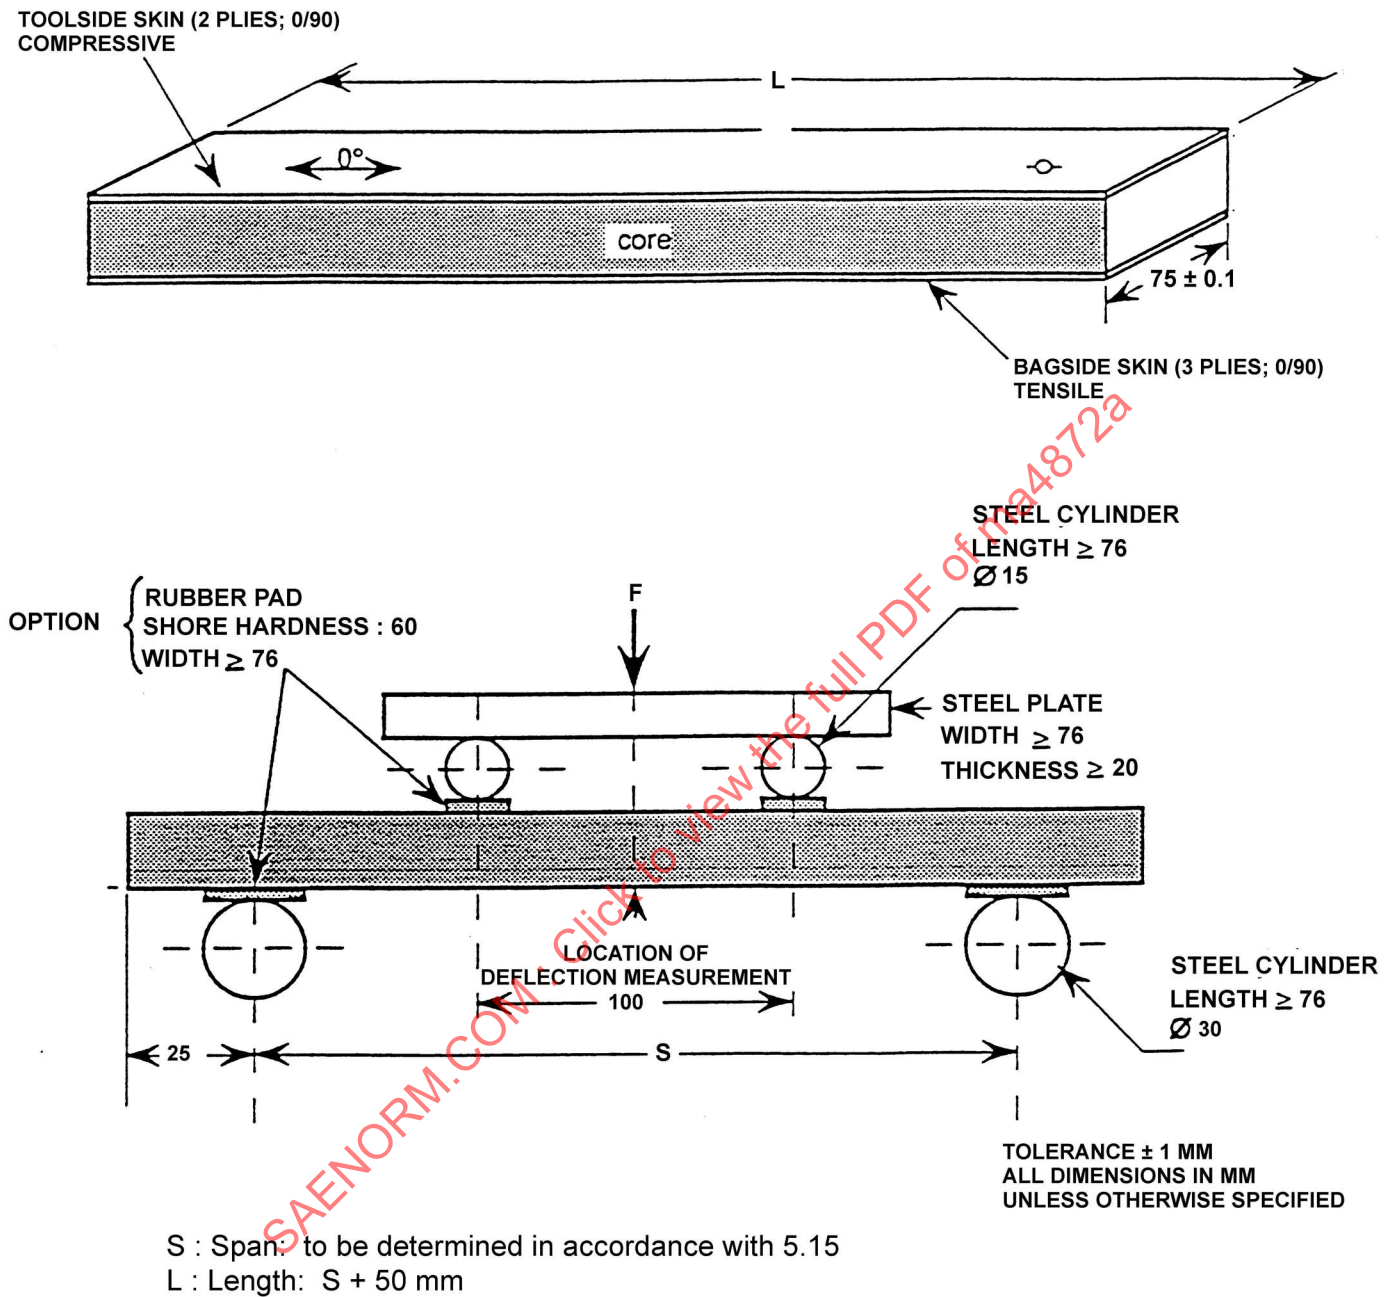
Long Beam Flexure Specimen and Test Fixture
